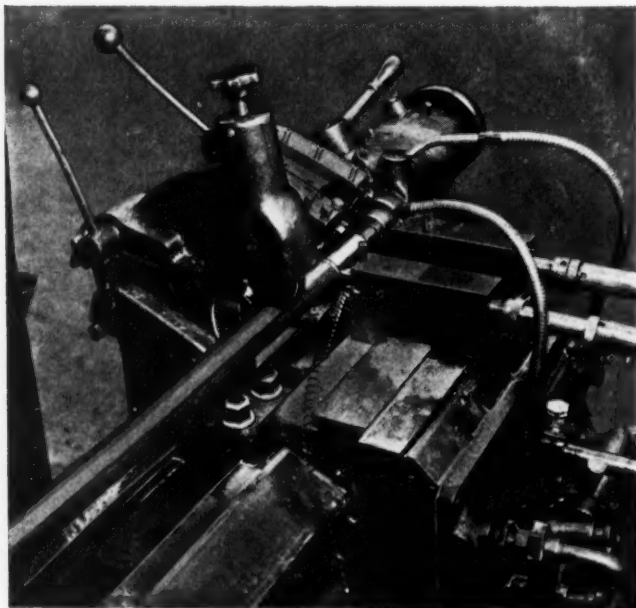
Tantalum-carbide Tool Turning Alloy-steel Propeller Shaft. Brinell Hardness, 302 to 340; Cutting Speed, 123 Feet per Minute; Pieces per Grind, 600 to 800
